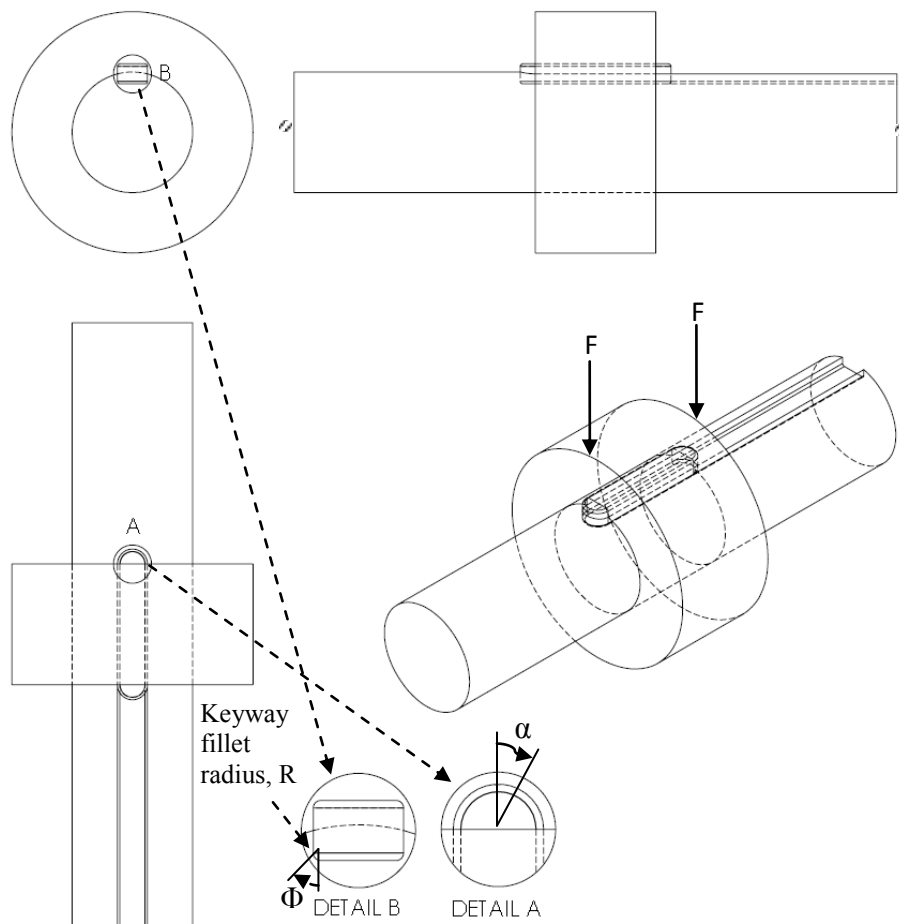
Bending model of hub, key and shaft with end milled keyway
